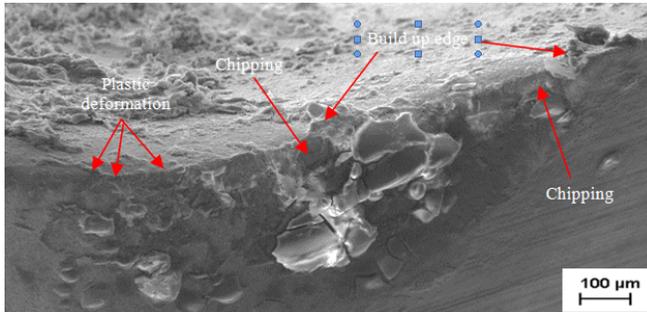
SEM images of a worn out view on the flank face for DLC coated carbide insert at cutting speed 350 m/min, feed rate 0.04 mm/tooth and radial depth 25 mm in dry cutting condition.
